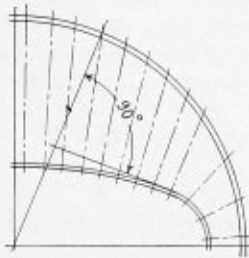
Staying for wrapper sheet of locomotive boiler
